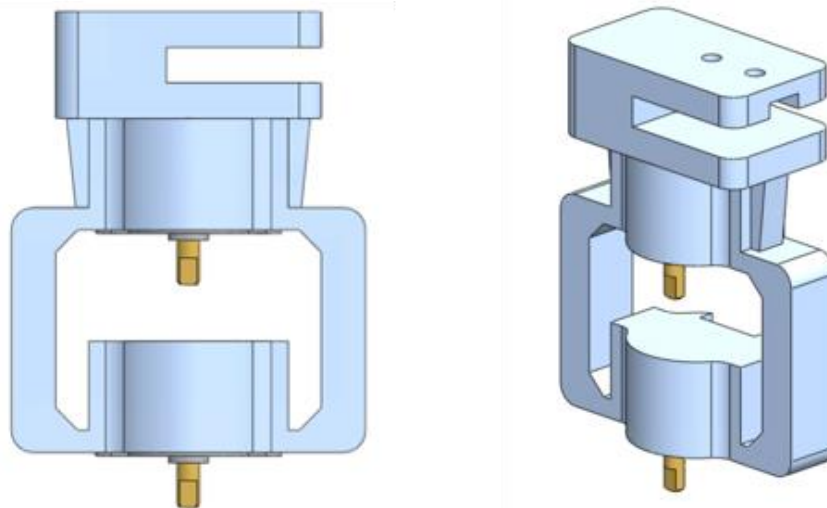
Design I - Stepper Motor to Microscope Stage Clamp
